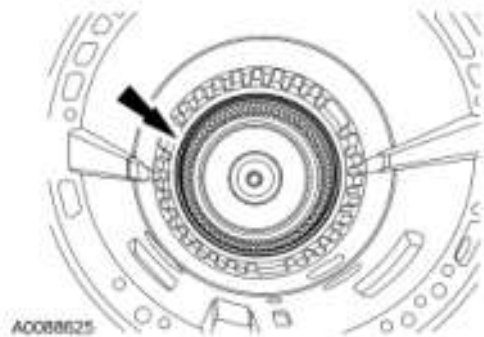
Locating Planet Carrier Hub & Output Shaft Assembly
